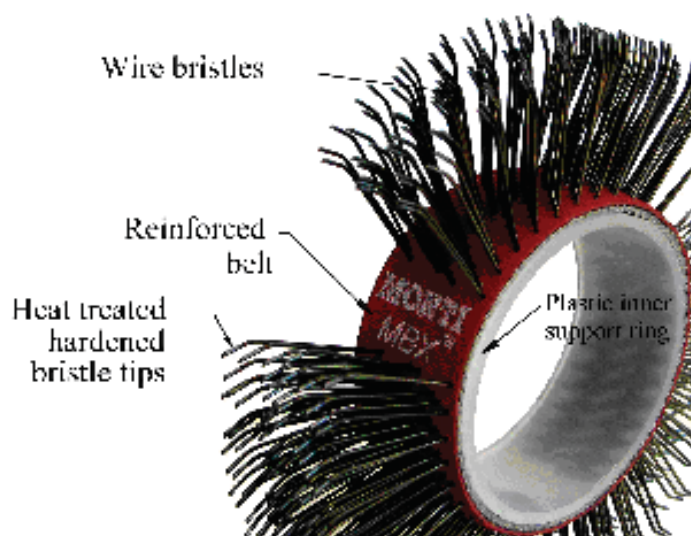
Design and construction of the bristle blasting tool. Tool shown is ready to be mounted on spindle.
